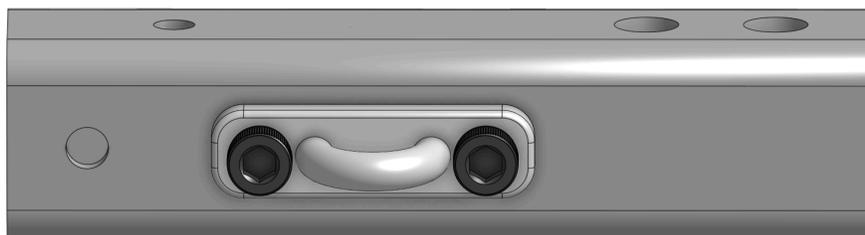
Stirrup attachment to wheelchair frame and fasteners.
